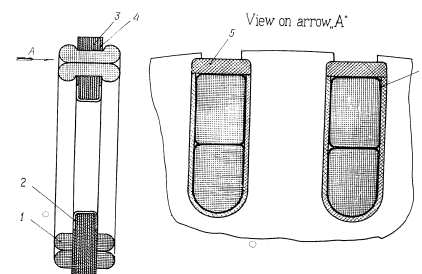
Design of Horizontal Erection Torque Motor Rotor.
